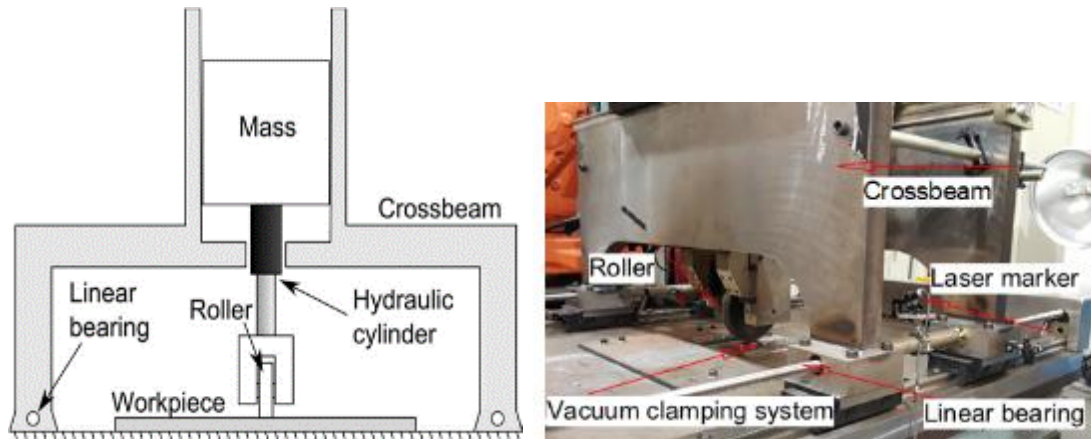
Schematic diagram of a rolling rig [184]. Includes oscillating mass, crossbeam, linear bearing, main hydraulic system, roller assembly, vacuum clamping system and laser marker
